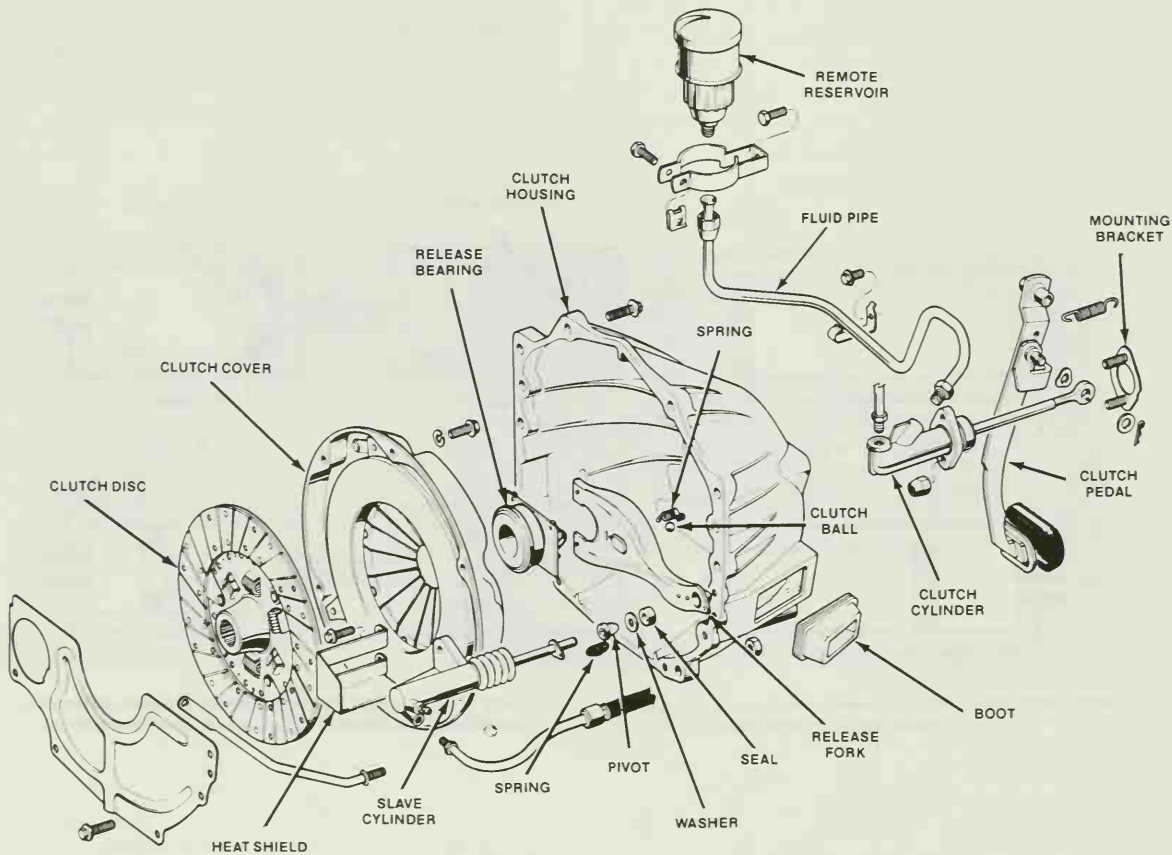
Parts of a hydraulic clutch linkage. (American Motors Corporation)
